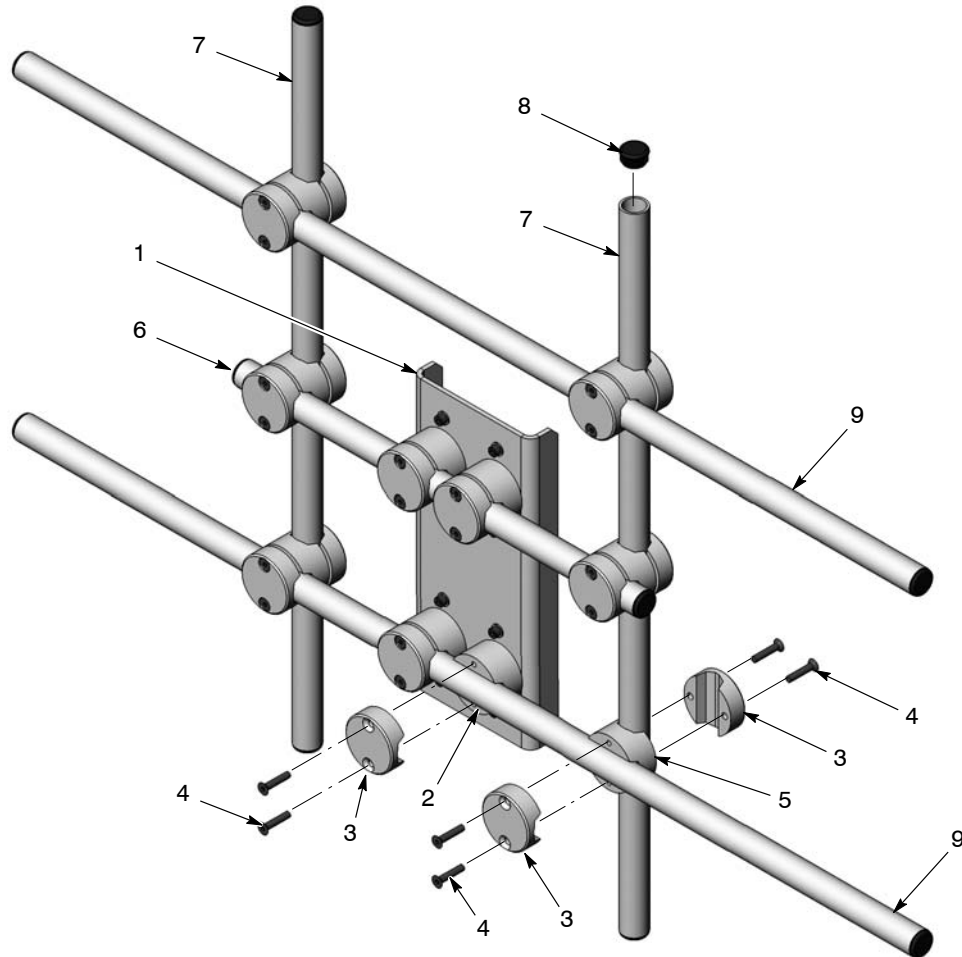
Multiple Horizontal Bar Gun Support Kit Assembly
